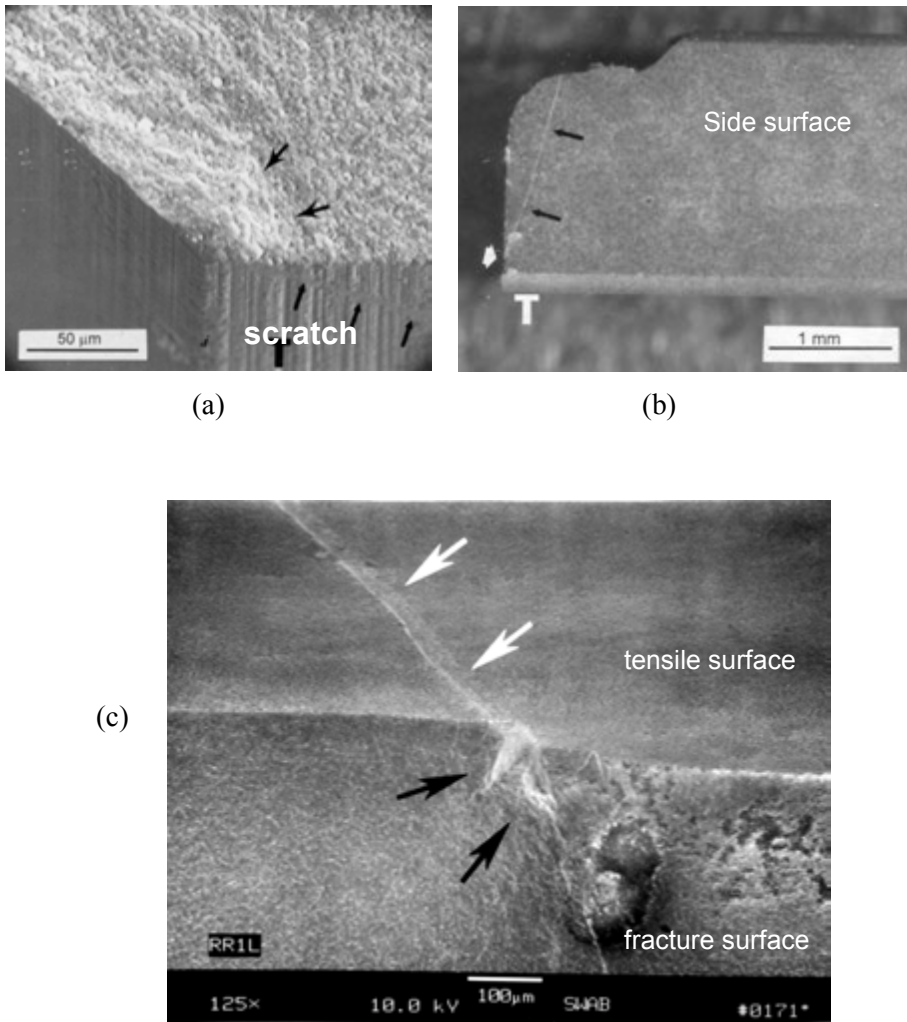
Examples of scratch origins with the scratch at an angle to the tensile stress. The cracks penetrate much deeper than the scratch groove depth. Scratches can create damage that may be mistaken for grinding cracks, so it is wise to look at the orientation of the scratch relative to the grinding striations. Scratches will be at irregular angles and are often isolated. (a) is in a SiAlON bend bar with a scratch near the chamfer. (b) is a side view of a reaction-bonded silicon nitride bend bar. Scratches often require illumination at just the right angle to be seen. (c) shows a scratch on an alumina bend bar surface (white arrows) and the continuation of it into the interior that acted as the fracture origin in a bend bar (black arrows) (c is courtesy J. Swab).
